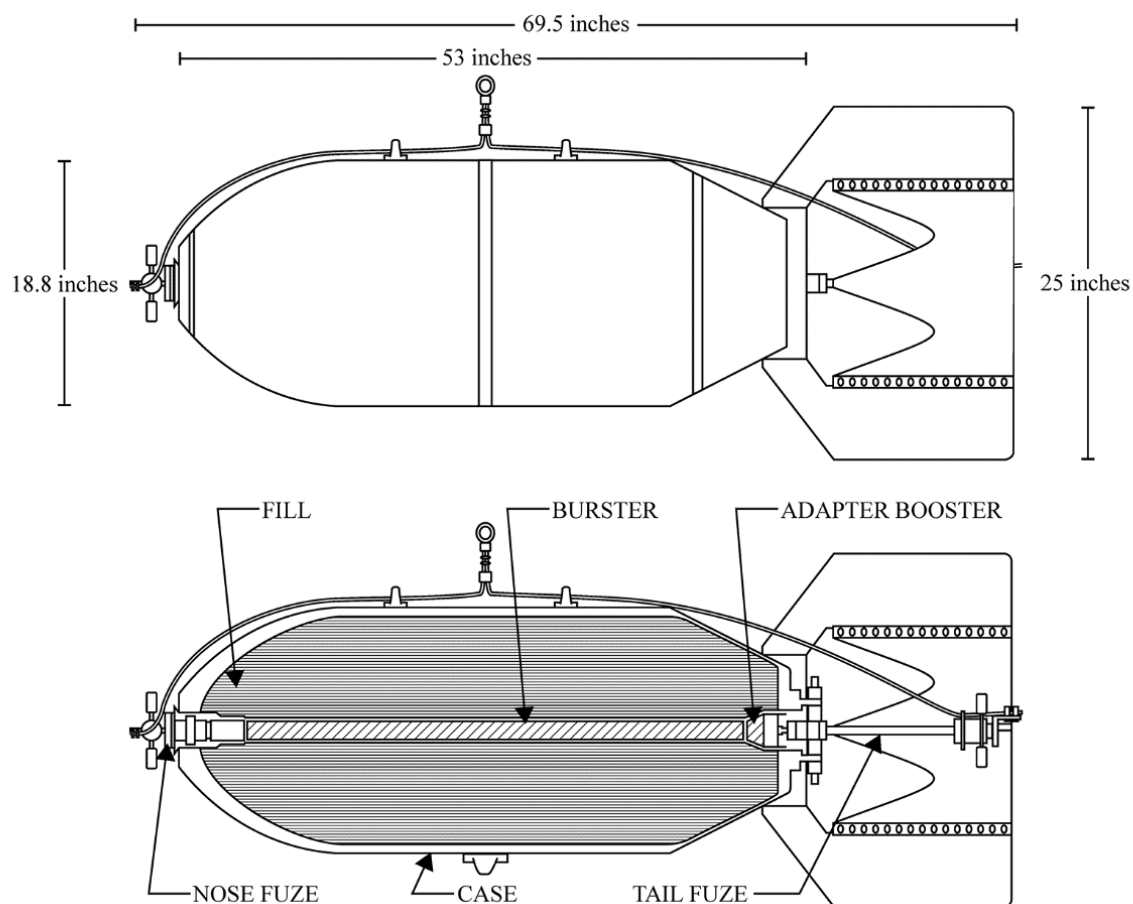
Bomb, 1,000-pound, T2 - Line Drawing
